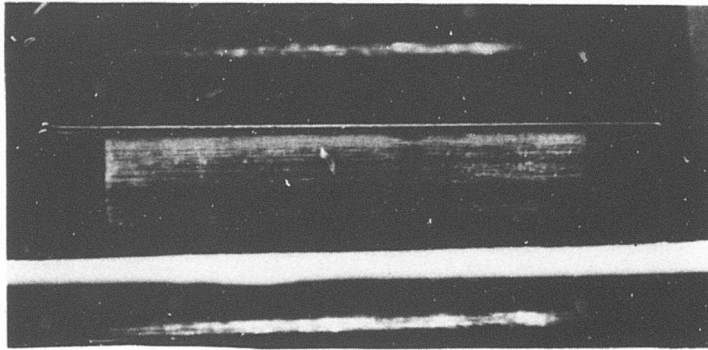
Lower Planetary Gear Following Input Pinion Failure at 90% Torque, $300^{\circ}\pm 5^{\circ}\text{F}$ Sun Gear Side.
